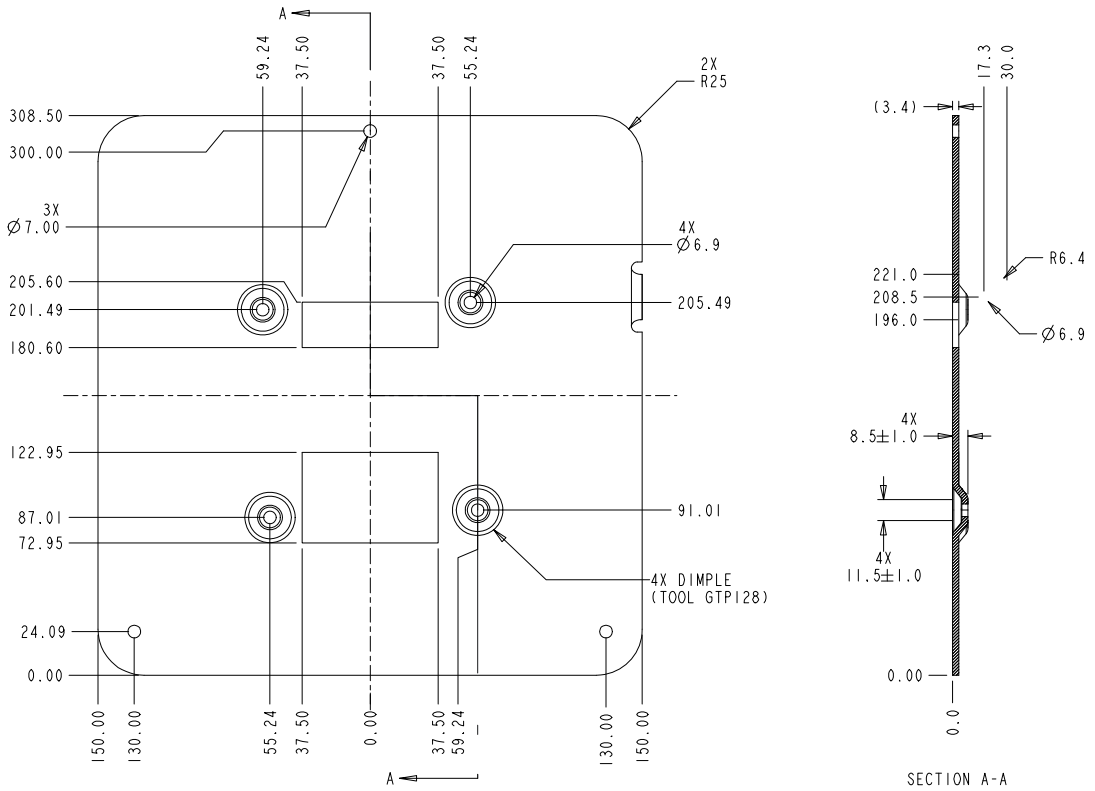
SMART-MR10 AG GPS 262 Layout Mounting Plate (70023086)
